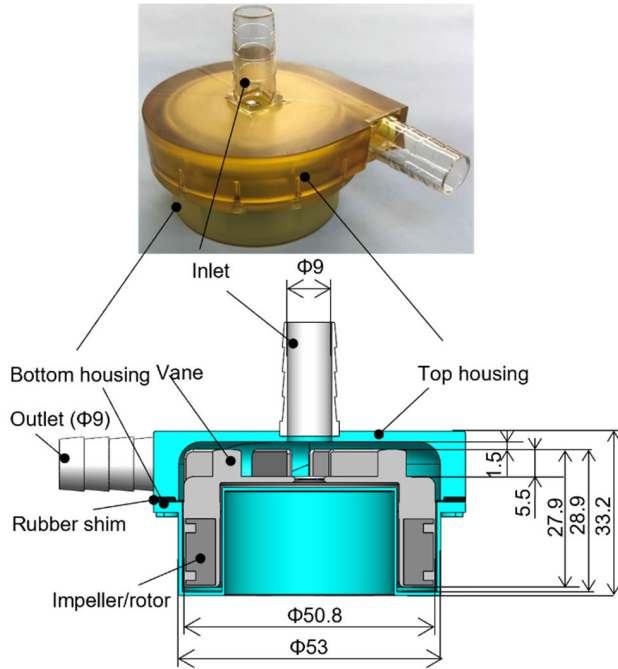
Photograph and cross-section view of the disposable pump head.
